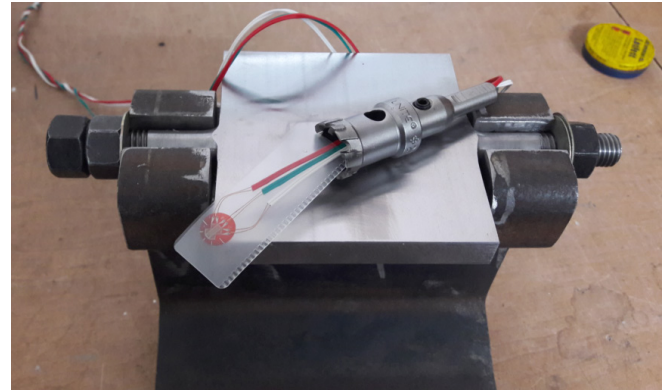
Devised fixture, specimen, cutter and rosette for experimental test
